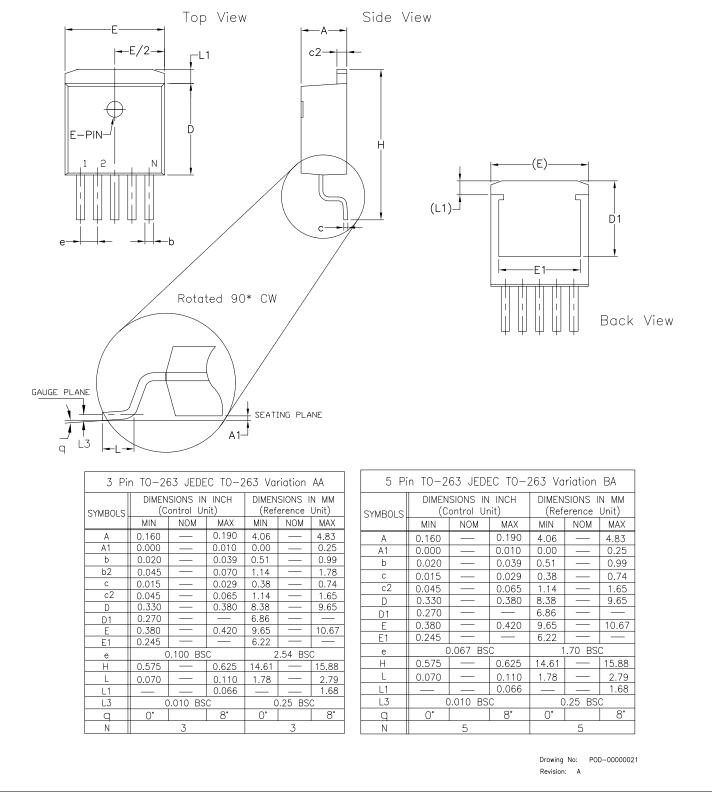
SPX2945 Mechanical Dimensions-3/5-Pin TO-263
